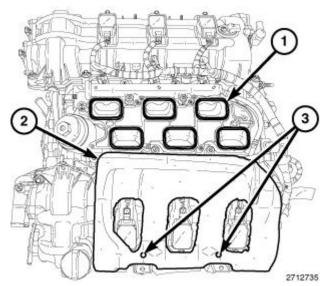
Intake Ports, Insulator & Alignment Posts Courtesy of CHRYSLER GROUP, LLC
